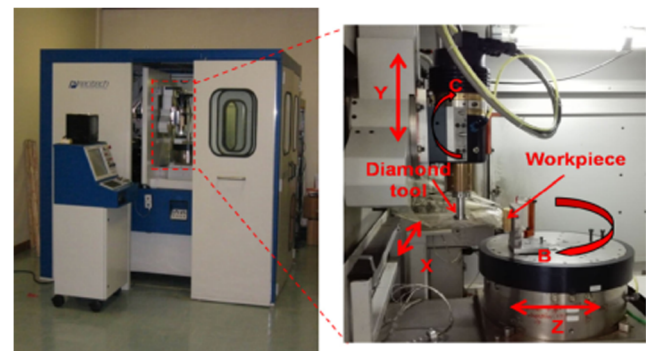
Freeform 705G ultra-precision machine and five axes of the machine tool
